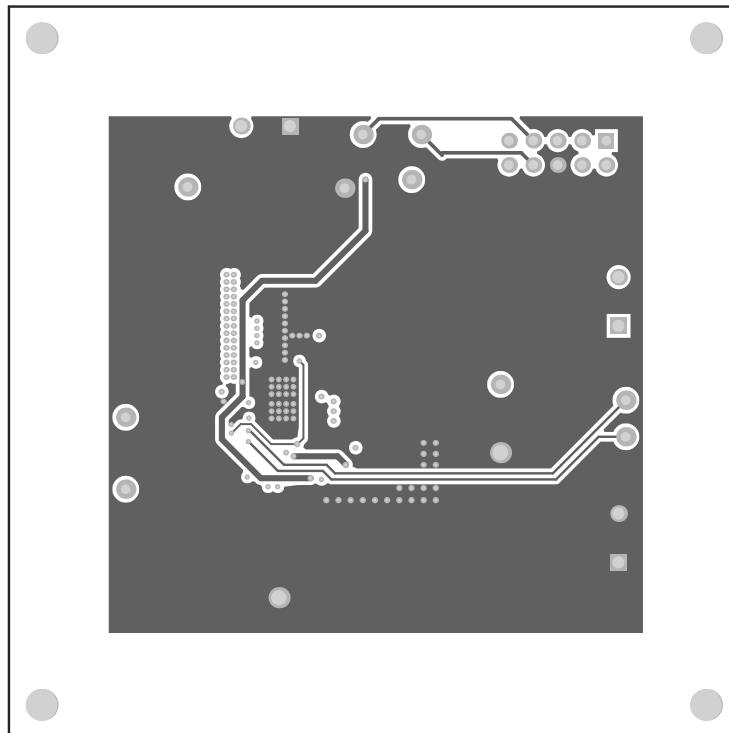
PWR-634EVM Top Layer Assembly Drawing (Top View)
